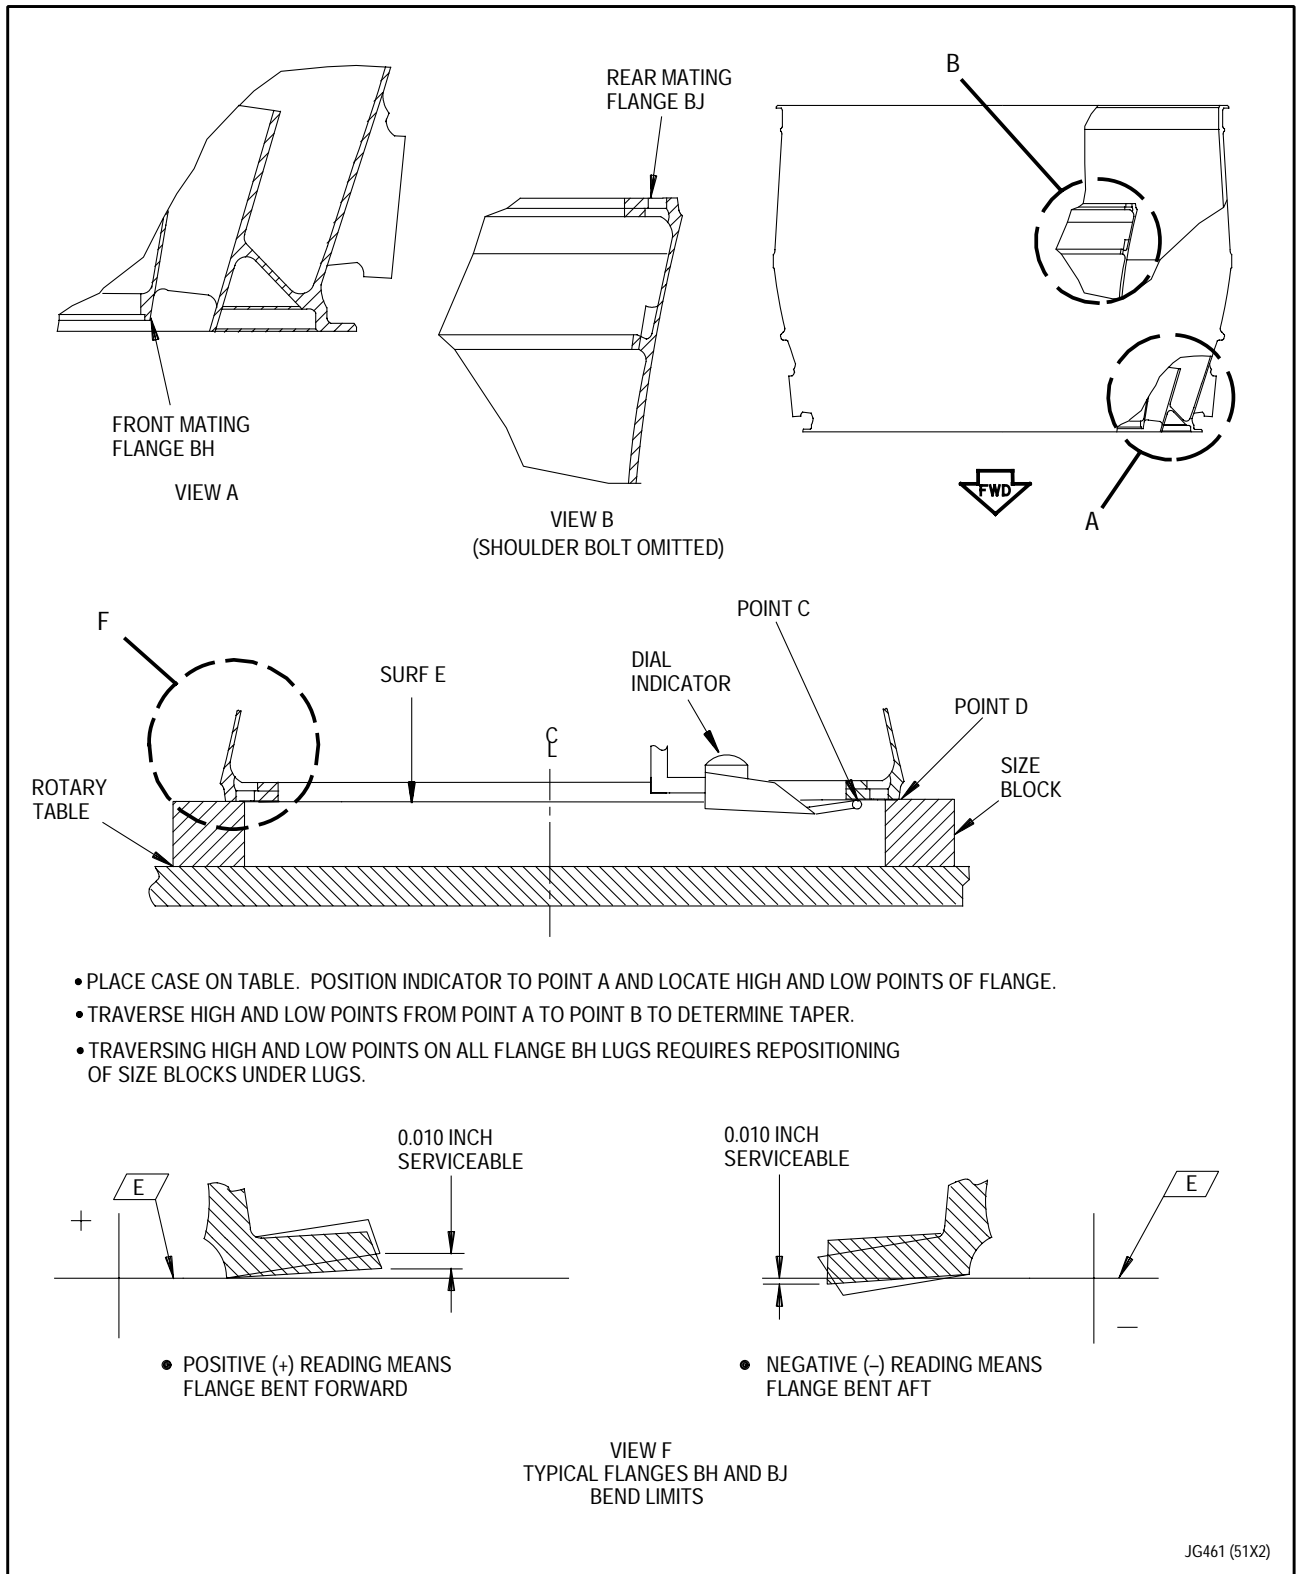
Diffuser Case Assembly - Inspection For Bent Front and Rear ID Flanges
